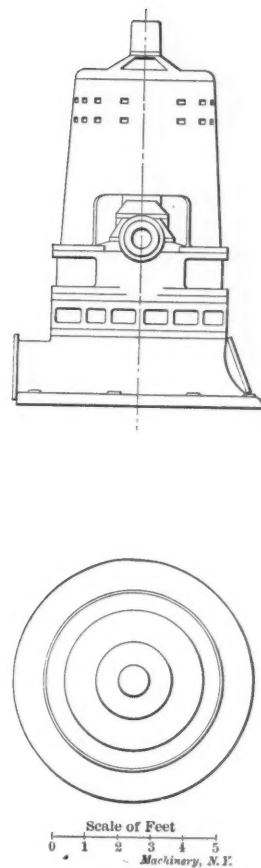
Plan and Elevation of 500 K.W. Curtis' Turbine and Generator.
